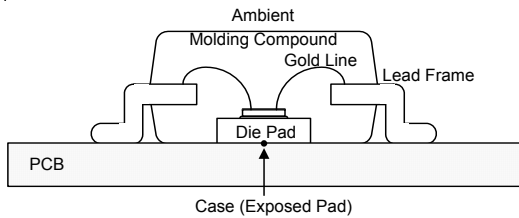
SOP-8 (Exposed Pad) Package Sectional Drawing
